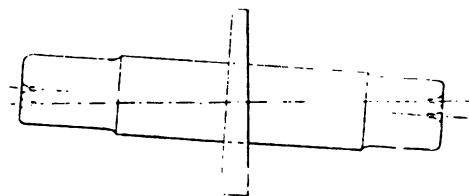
Mandrel Set for Turning Diagonal Joints of Cutters.
